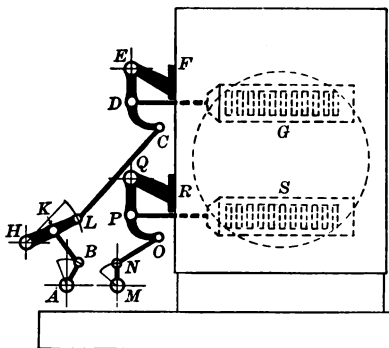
DIAGRAM OF VALVE GEAR, McINTOSH, SEYMOUR & CO. HORIZONTAL ENGINE
